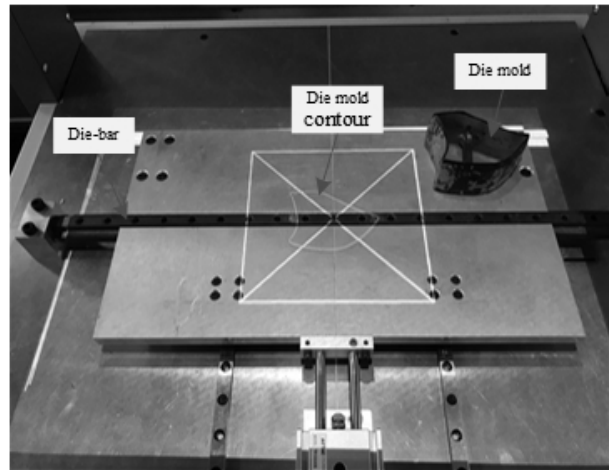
Schematic of a die-mold contour projected onto a die-bar fixture
